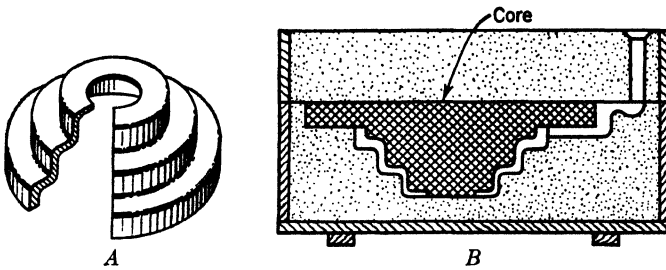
A*. Lamp-base casting. *B*. Cover core used to form interior of lamp-base casting.
